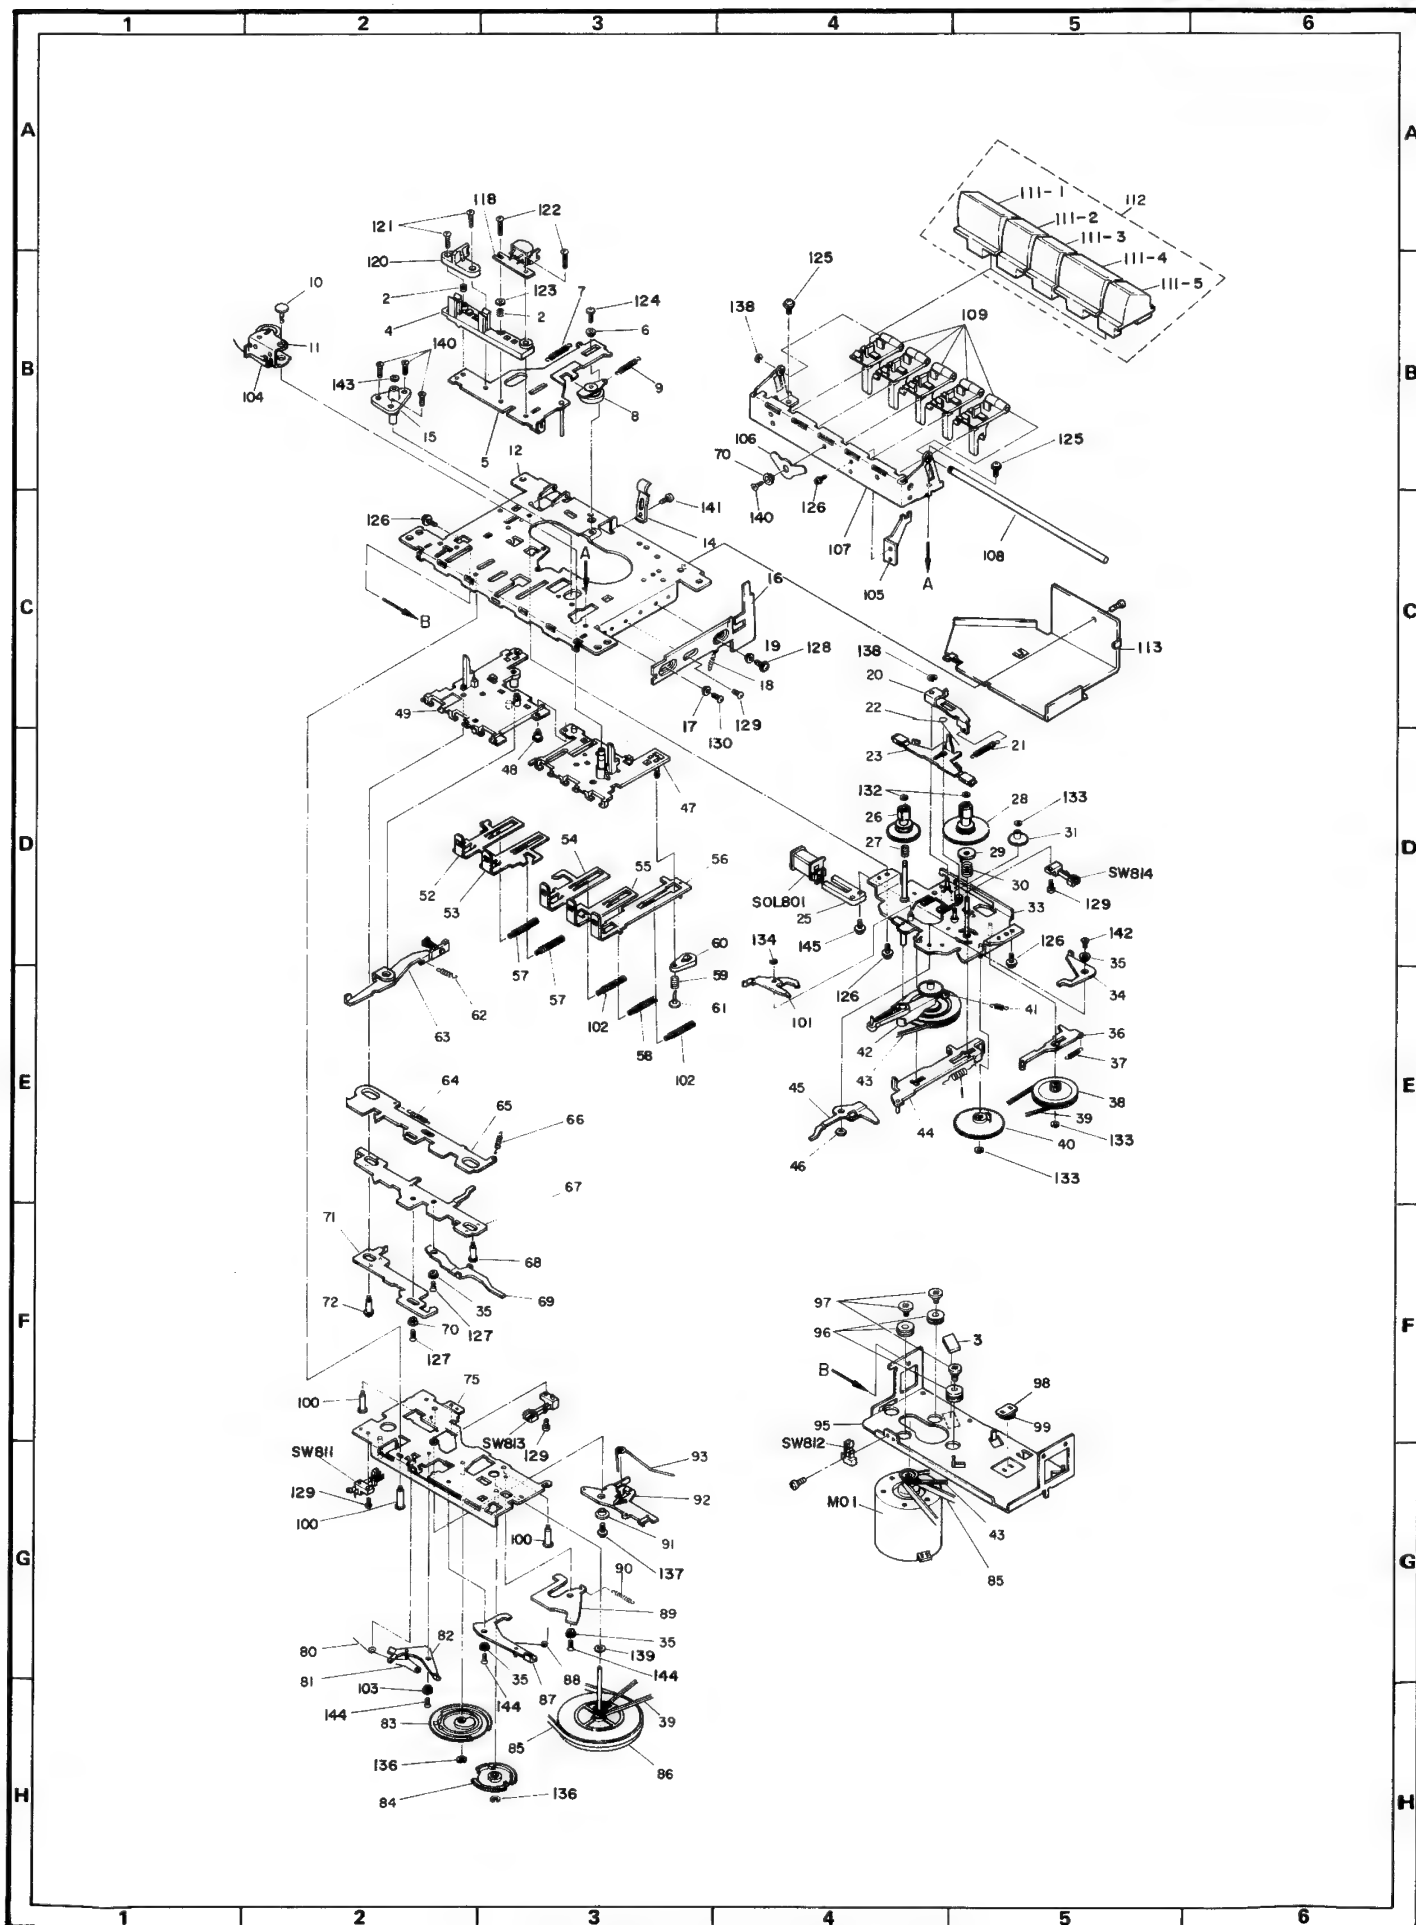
DECK 1 MECHANISM EXPLODED VIEW
